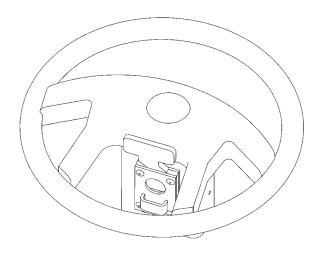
LOCK TAB TYPE STEERING LOCK ENGAGED
